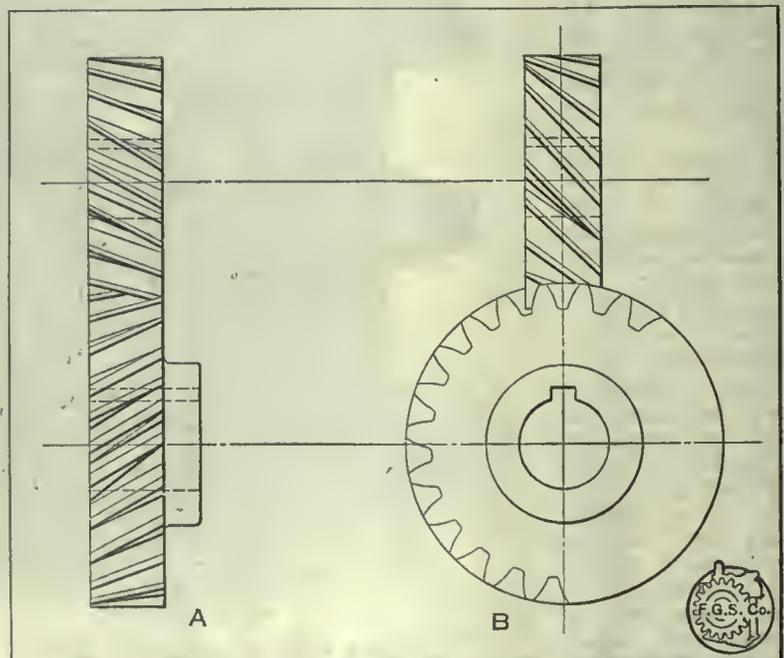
HELICAL GEARS OPERATING ON PARALLEL SHAFTS, AND SHAFTS LOCATED AT RIGHT ANGLES TO EACH OTHER.
